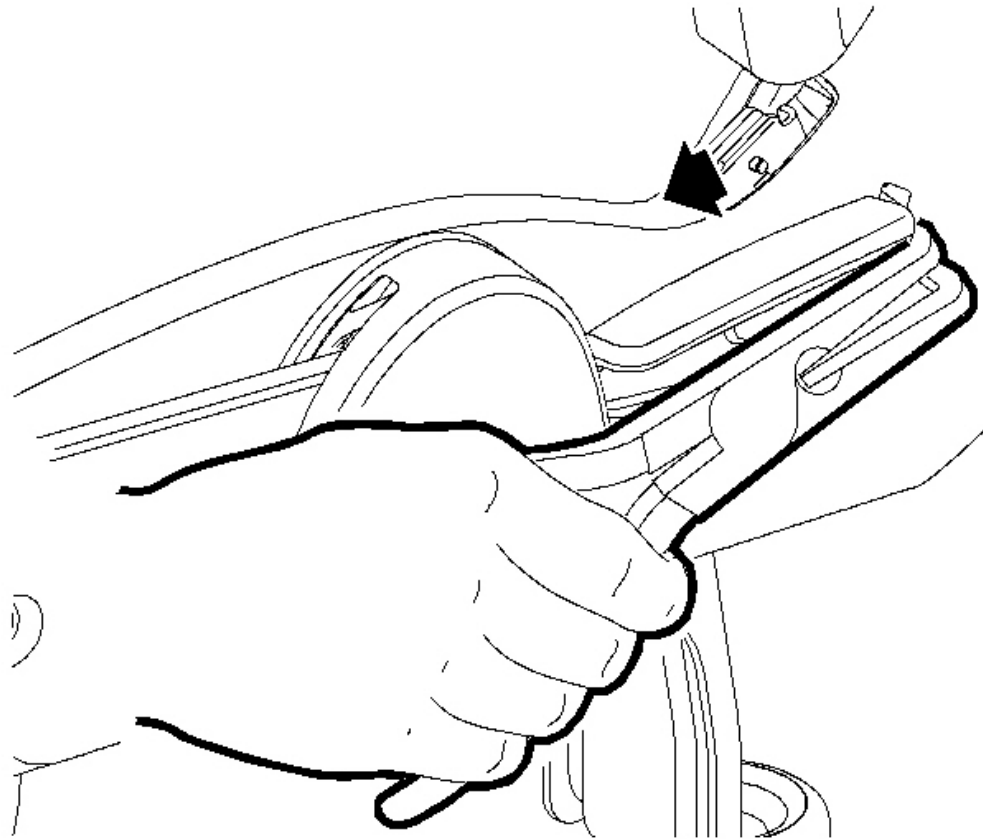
Removing Seat Cushion Trim Panel From The Seat
